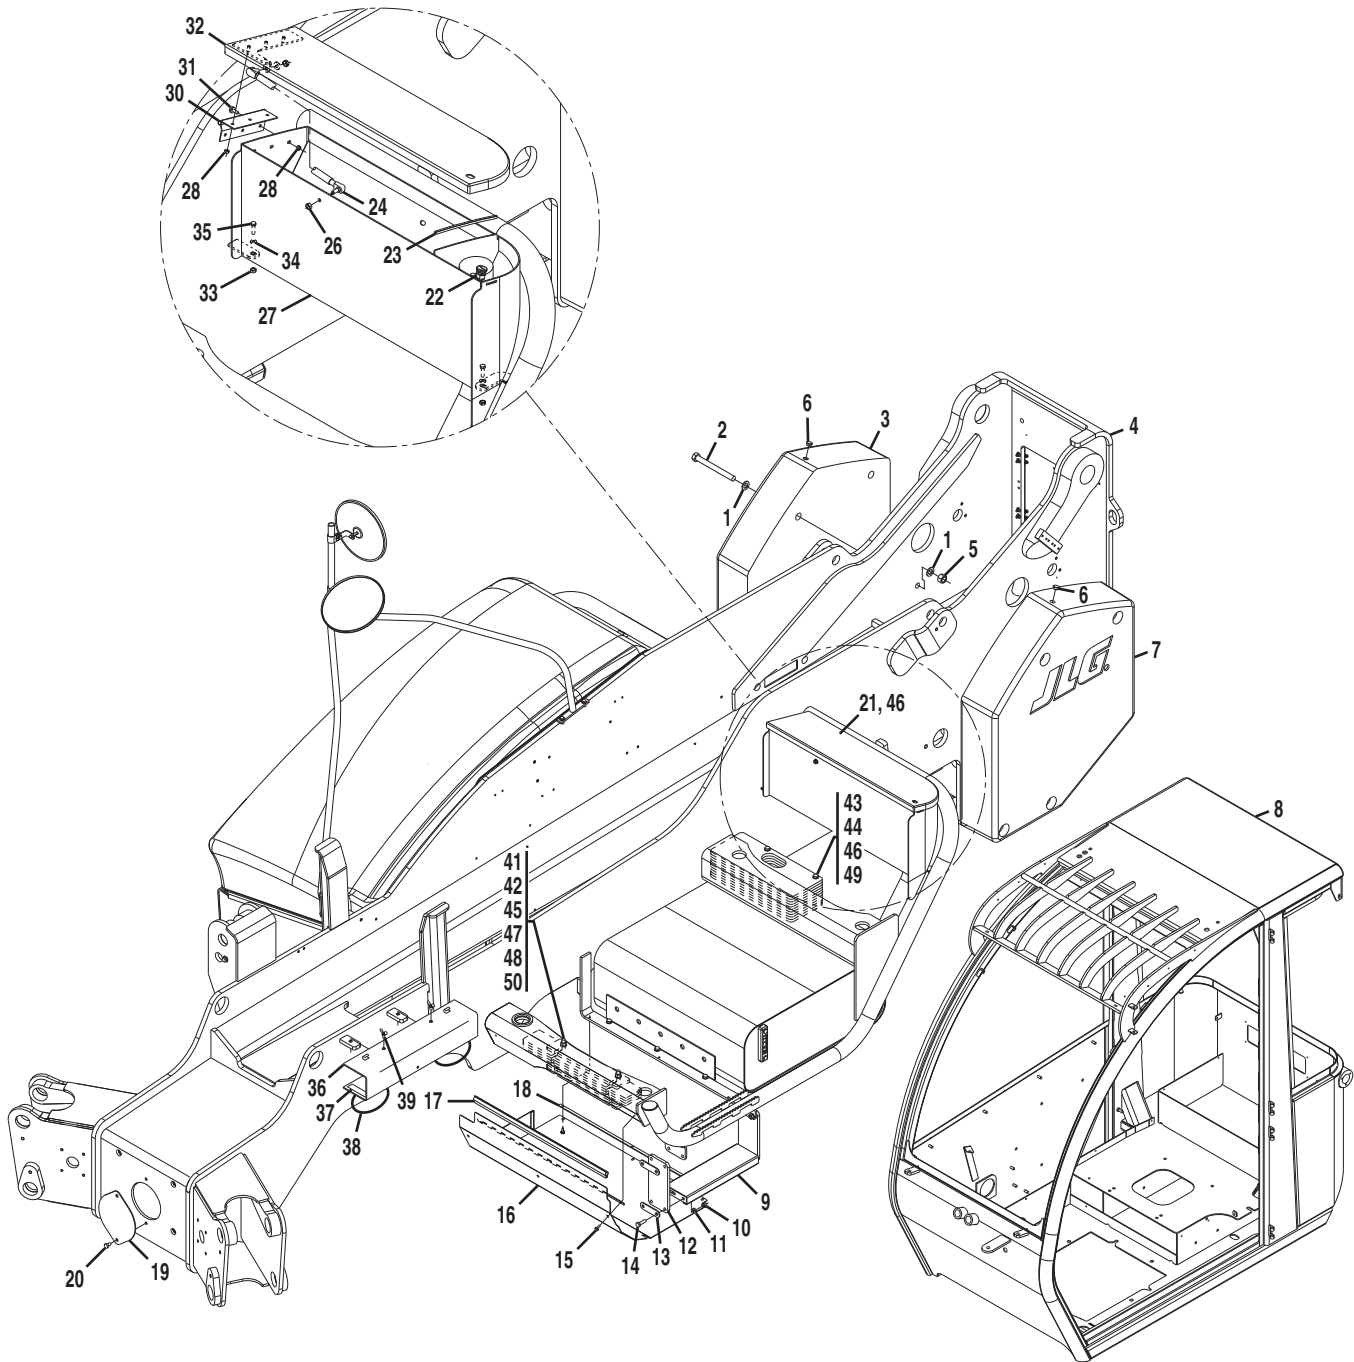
Frame Shrouding & Attaching Parts, Left Side
